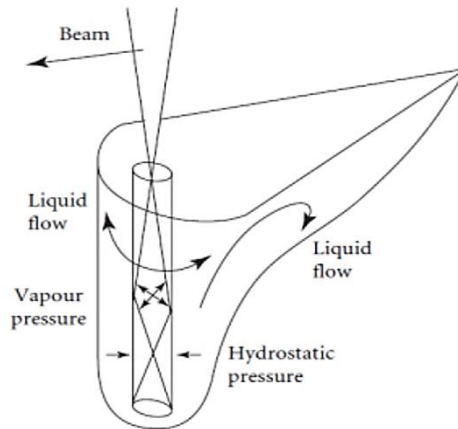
keyhole weld pool. Taken from [117].
